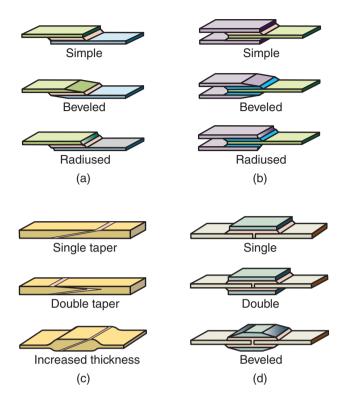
Desirable configurations for adhesively bonded joints: (a) single lap, (b) double lap, (c) scarf, and (d) strap.
